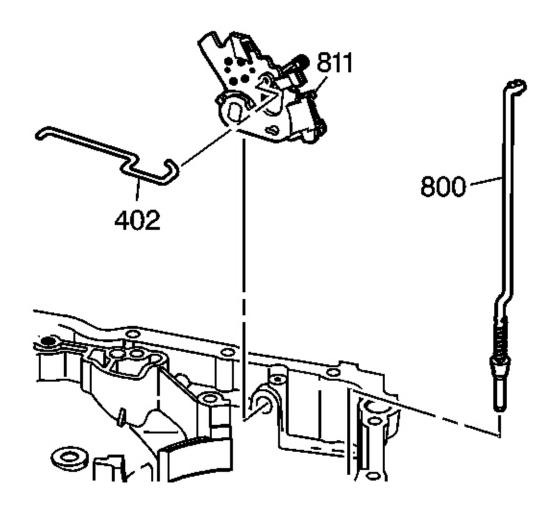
Removing IMS/Detent Lever Assembly & Park Pawl Actuator Assembly Courtesy of GENERAL MOTORS CORP.
